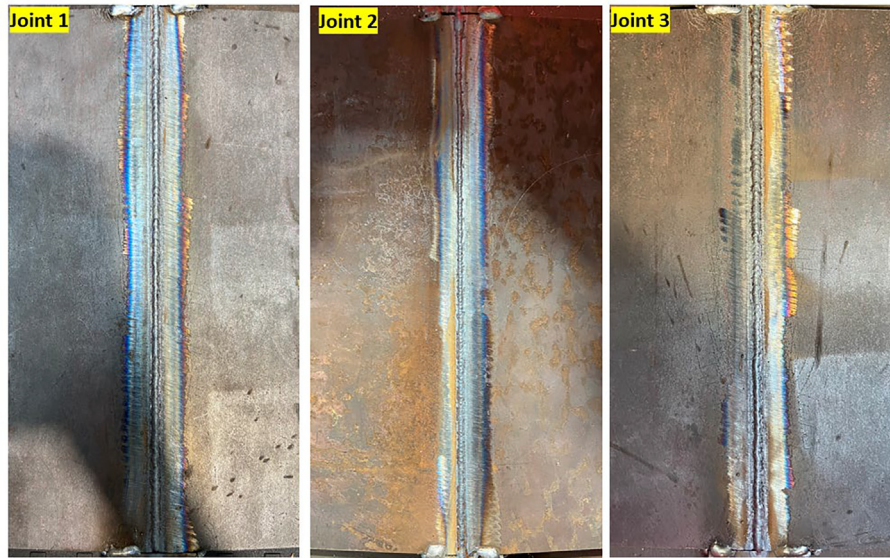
Back-side per welded joint demonstrating consistent and repeatable root penetration.
